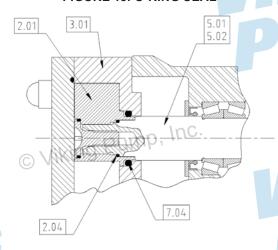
SINGLE UN-FLUSHED MECHANICAL SEAL
